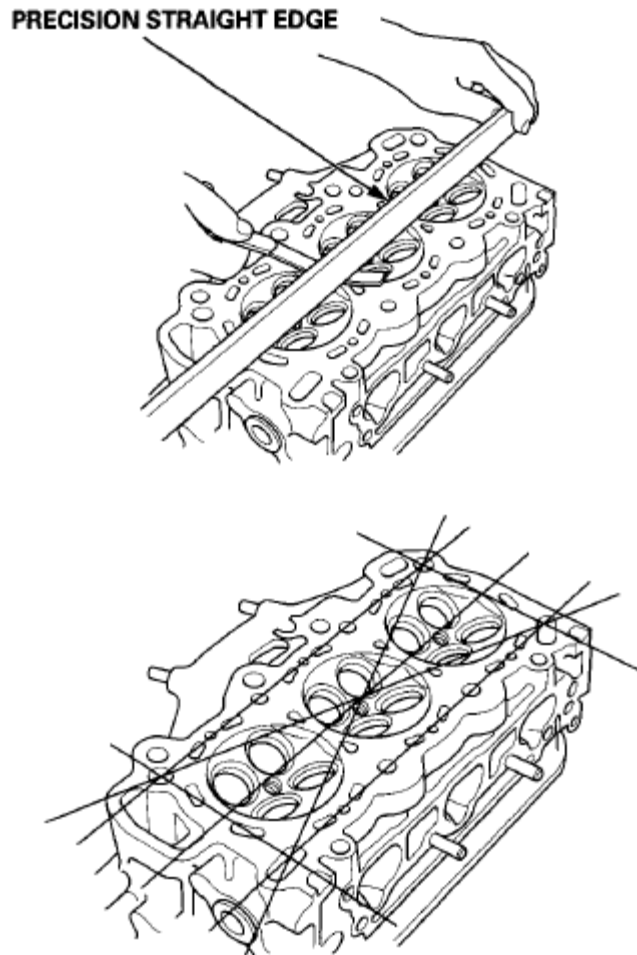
Inspecting Cylinder Head Warpage
